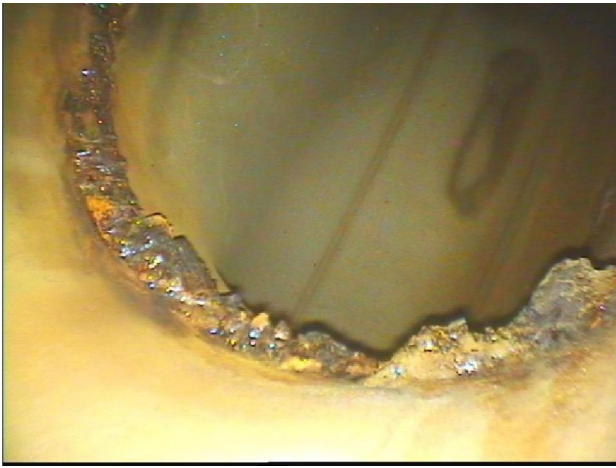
Preferential Weld Root Corrosion <sup>1</sup>
